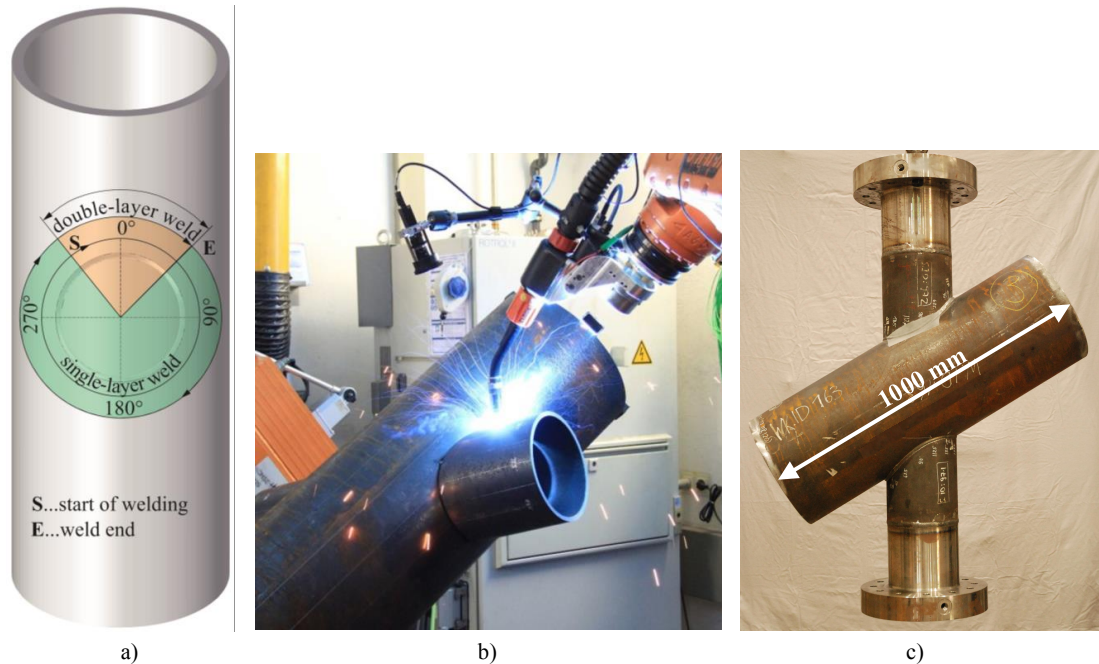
a) Setup of the gas metal arc welding process along the weld trajectory, (2); b) Automated welding of a tubular X-joint; c) Final geometry of the tubular X-joints with added ring flanges
